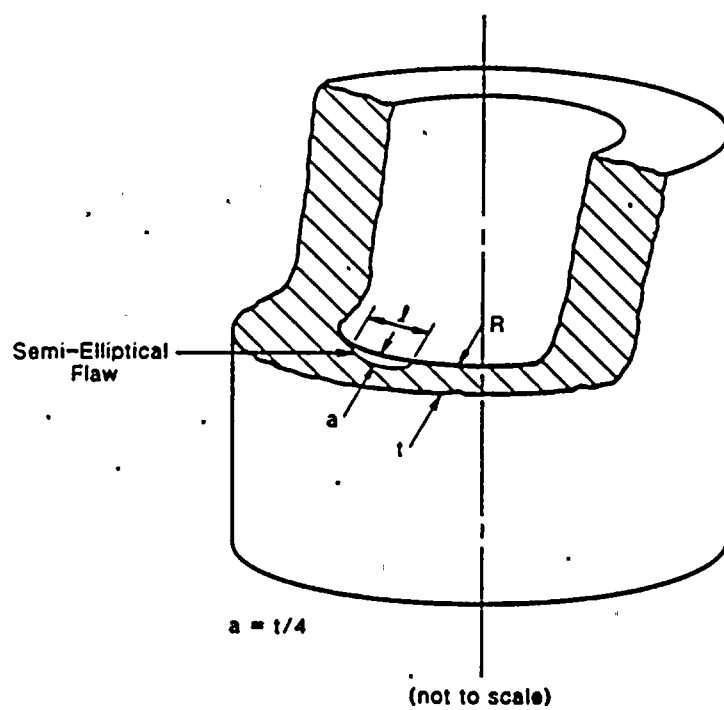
Schematic of a Part-Through, Circumferential Surface Flaw in a Cylinder - Elliptical Flaw
